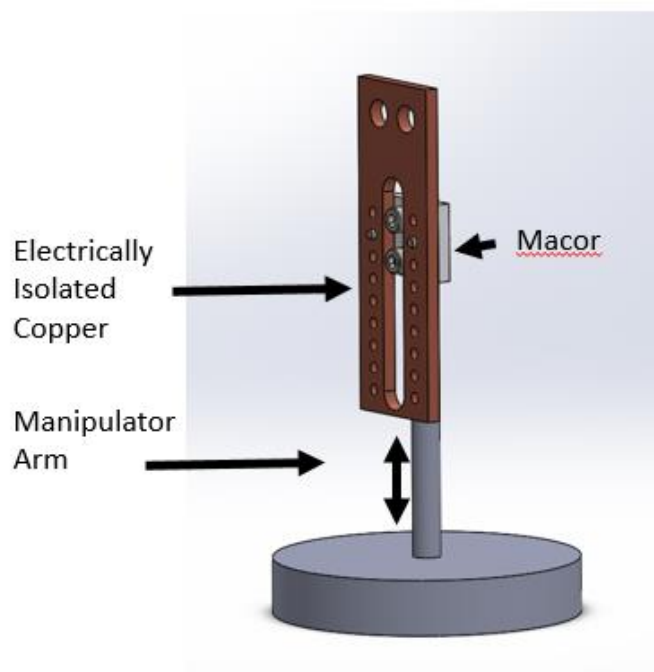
Copper beam scraper CAD design connected to a one dimensional position manipulator arm
